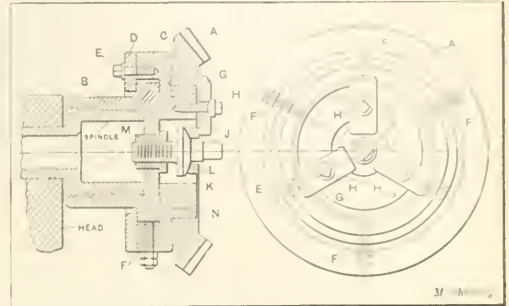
Ring Bevel Gear holding Fixture provided with Adjustable Clamps
